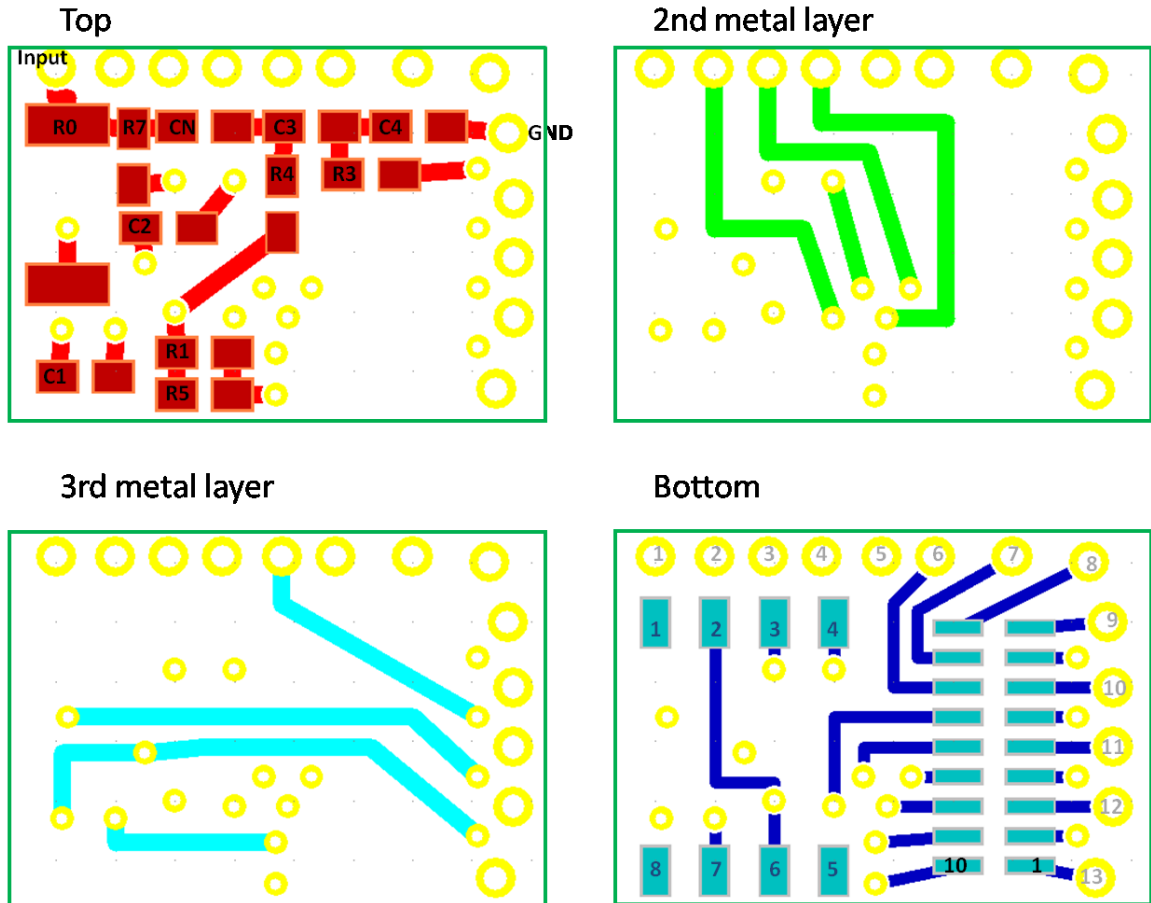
The mini-headstage PCB layout for each metal layer (projection views).
